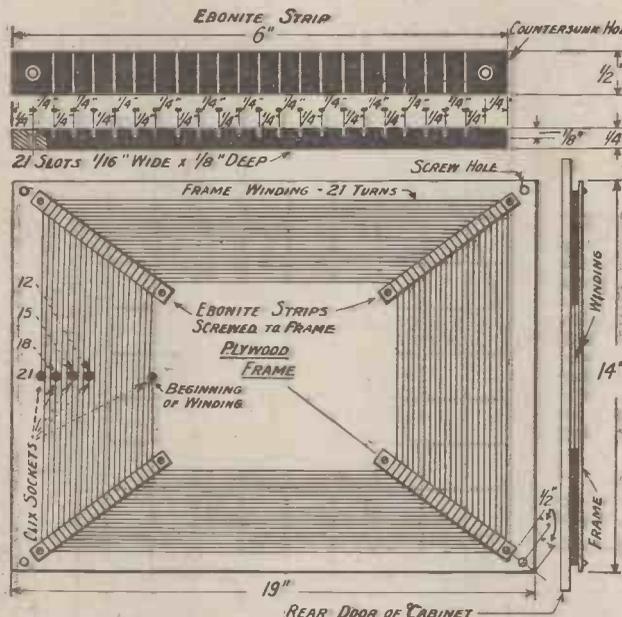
The complete constructional details of the frame aerial are given in this drawing.
